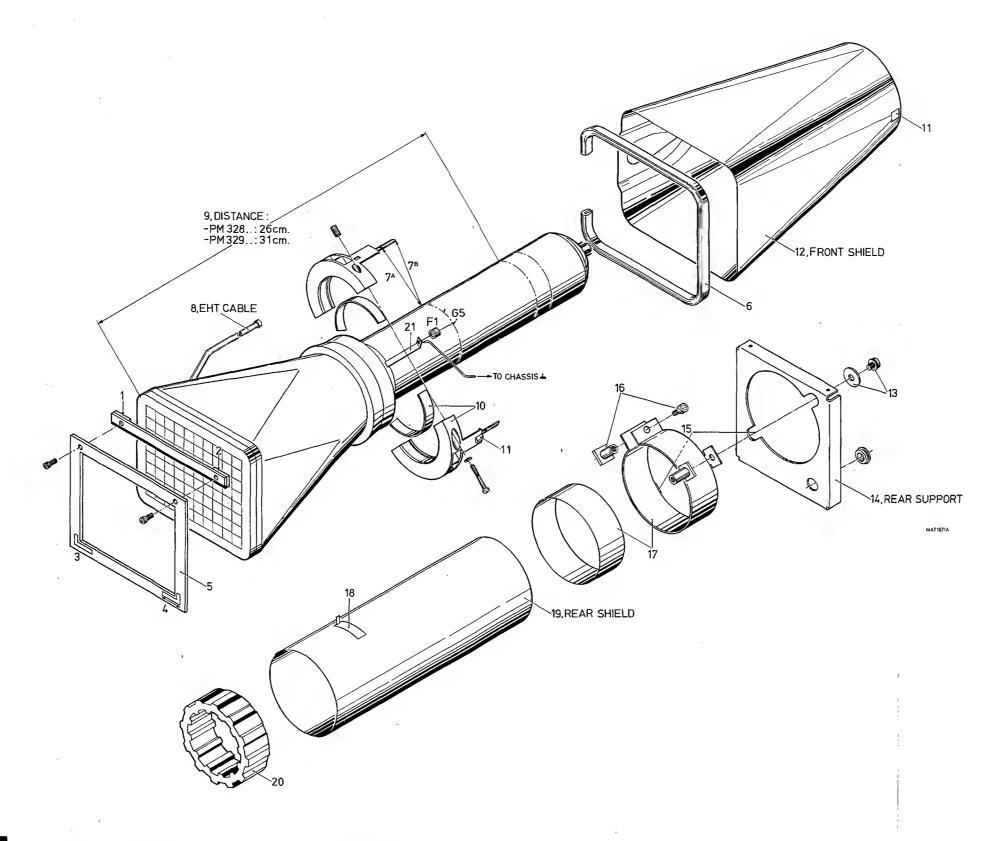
Exploded view of CRT and belonging mechanical parts.
